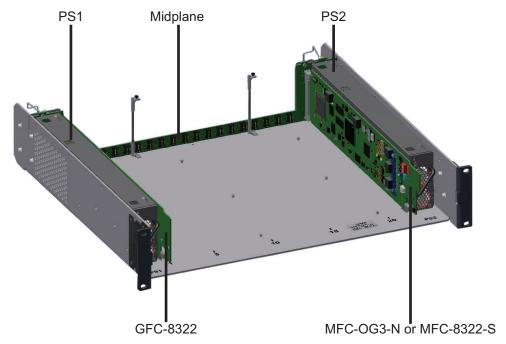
OGX-FR — Card Locations (View from Front of Frame)
